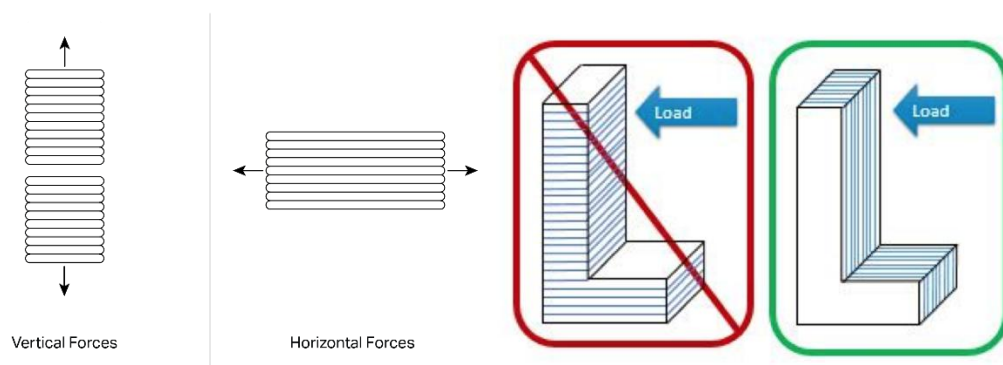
Illustration of how force should be loaded on 3D printed parts [34][35]
